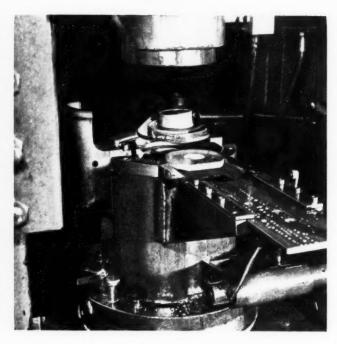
Here a Swinging Arm is Removing One Flanged Piece, while another Piece is Ready to Slip into Place for the Extruding Operation
